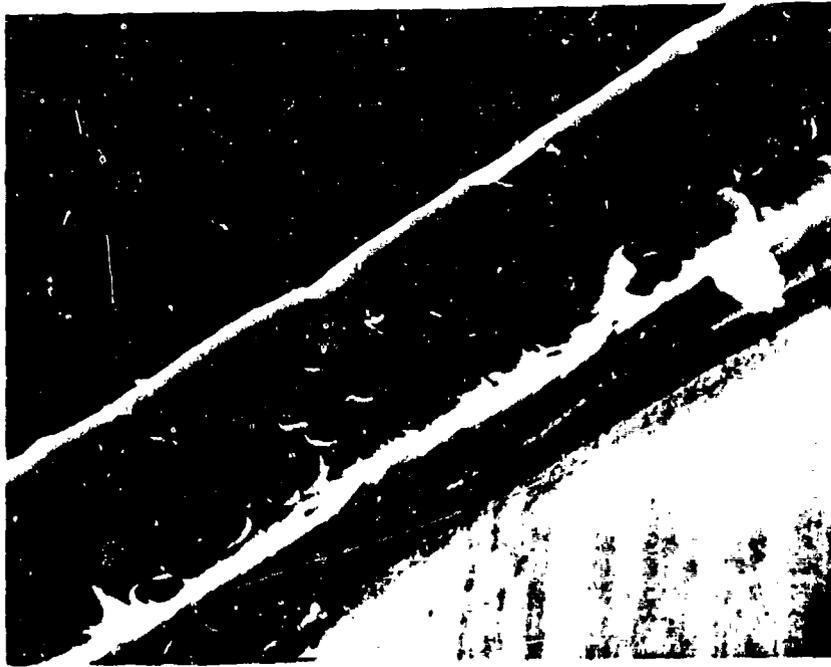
Slit Edge of Aluminum Foil Cut by Rotary Shears
